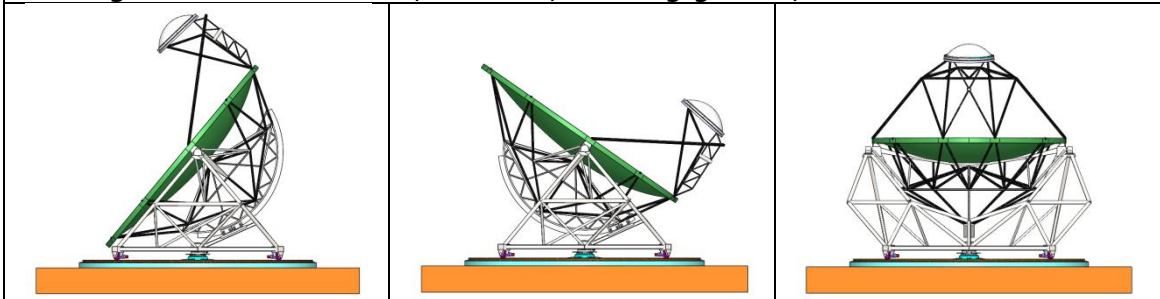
Offset High, 4 wheel, Bearing guided, Elevation 5°
